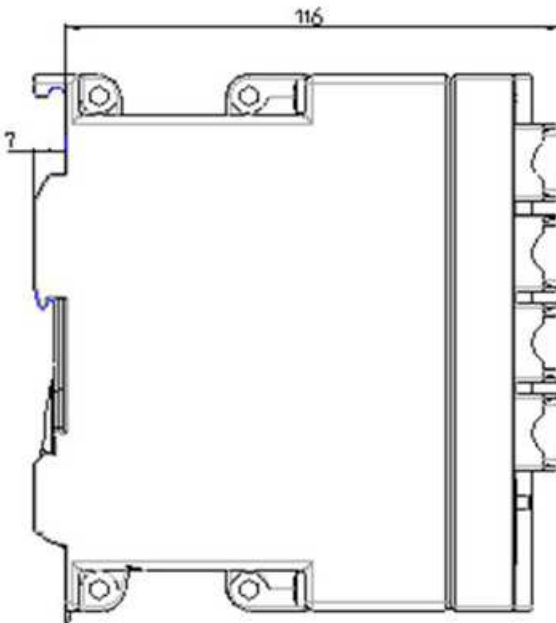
Large design dimension drawing Part 2 (example used here SCALANCE X320-3LD FE)
